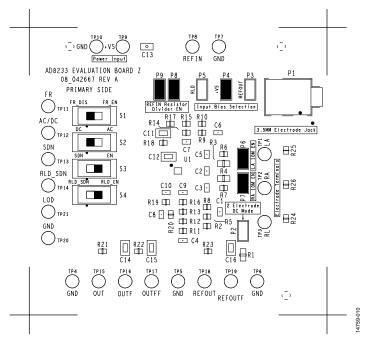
AD8233CB-EBZ Evaluation Board Top Assembly
